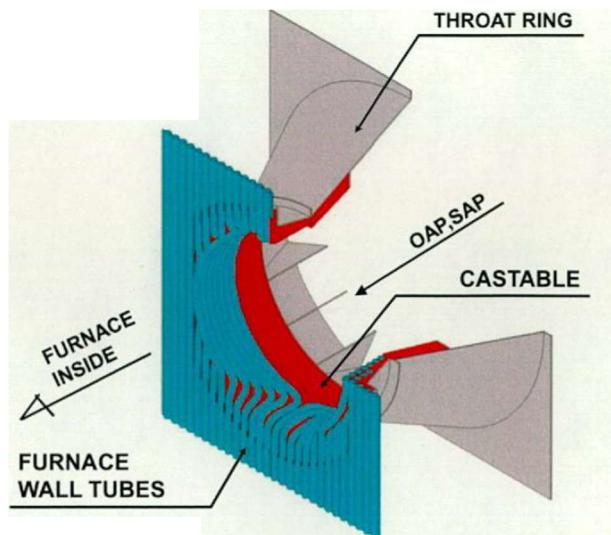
(d) Outline drawing of OAP, SAP
